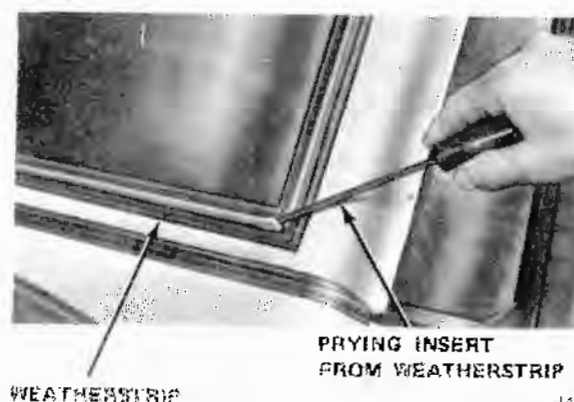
Removing Windshield Moulding Insert from Weatherstrip
